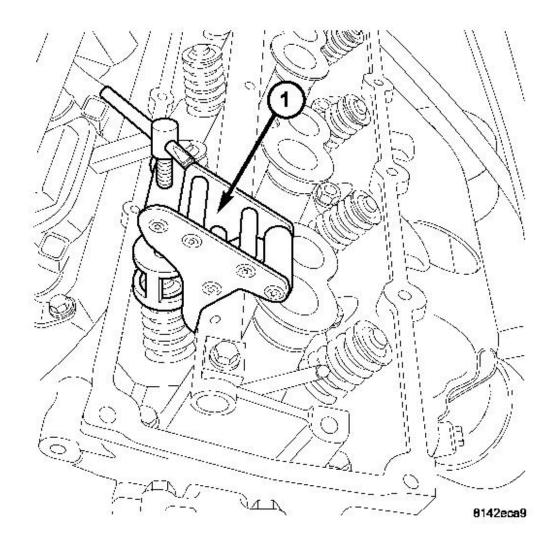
Valve Spring Compressor Tool 9065 Courtesy of CHRYSLER LLC
